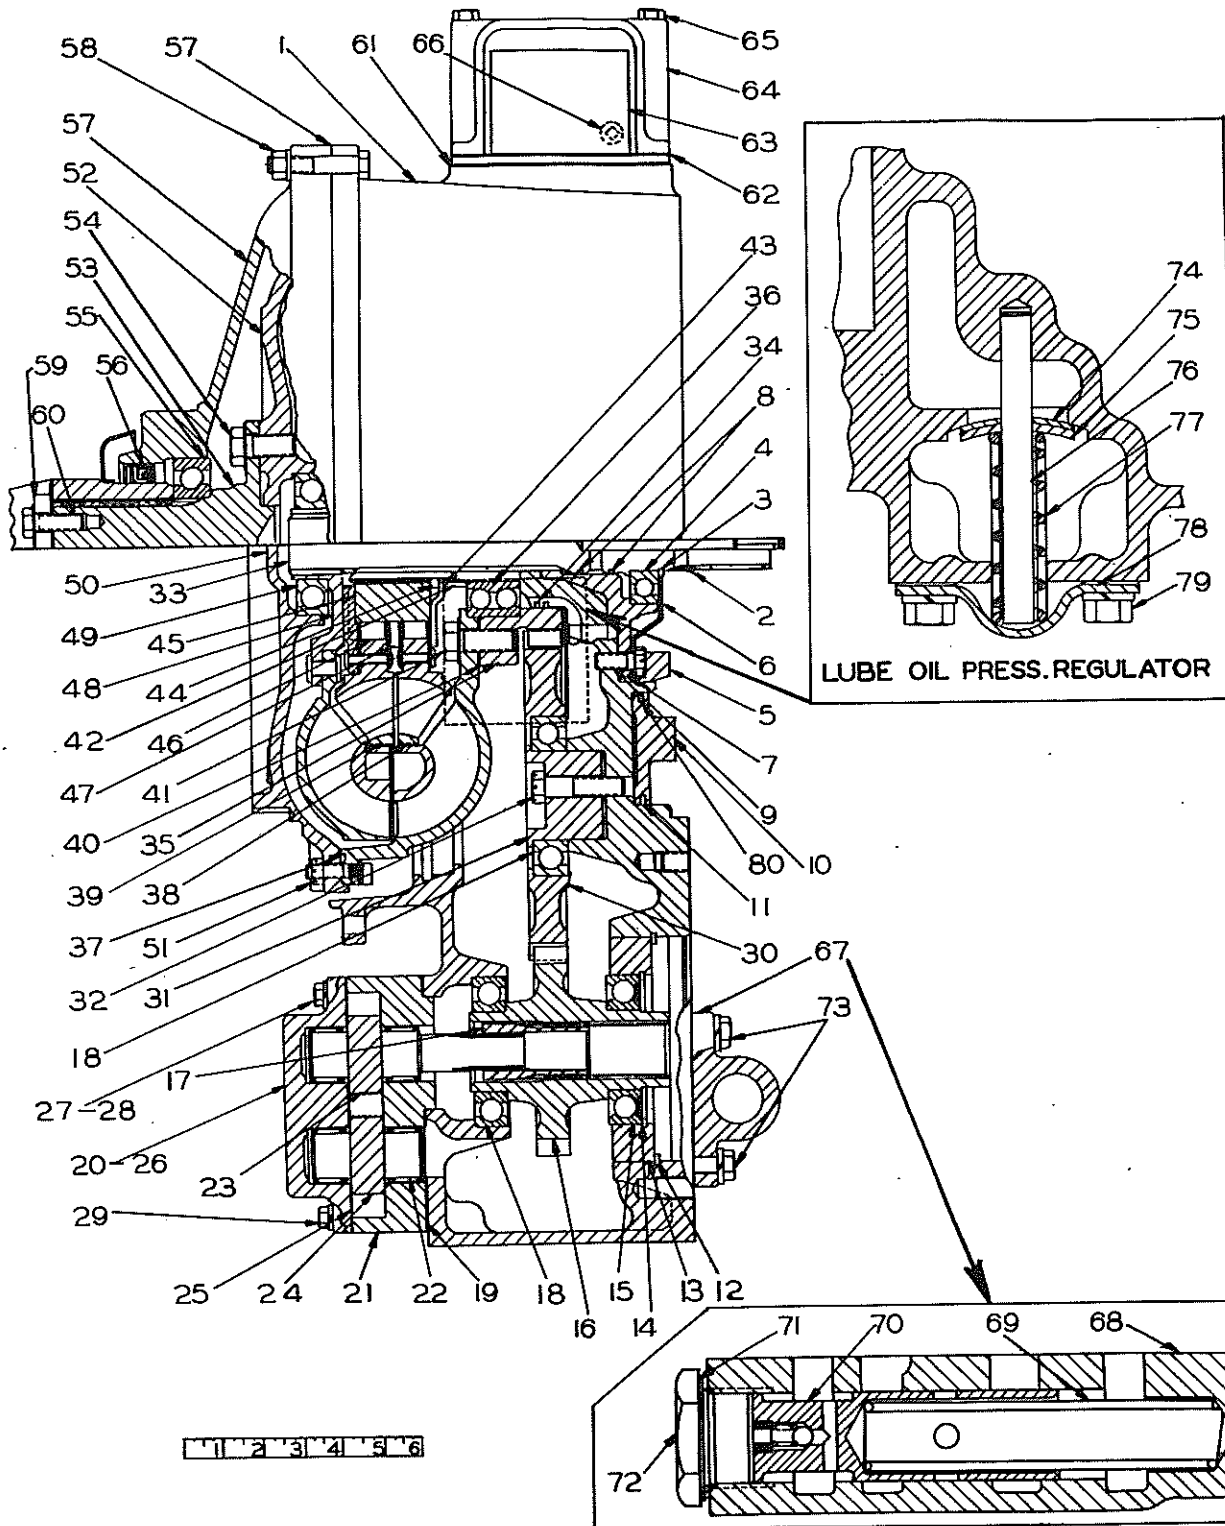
TRANSMISSION - TORQUE CONVERTER AND HOUSING GROUP
